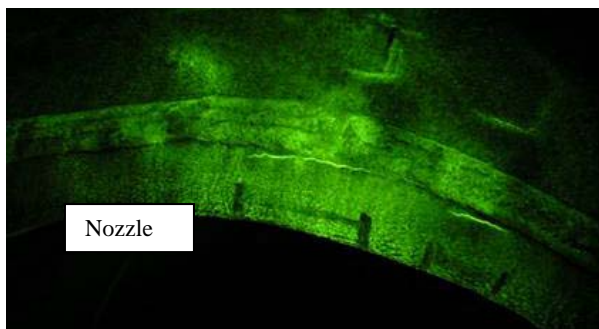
Illustration of cracking at the top of the outlet nozzle at the toe of the weld on the nozzle side at the 12 O'clock position.
